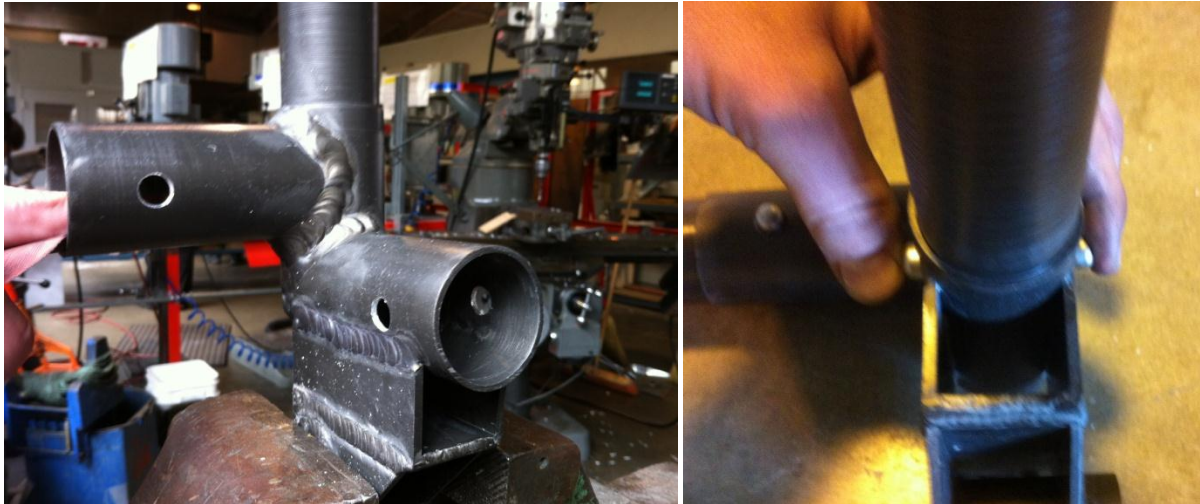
A) TRI-JOINT AFTER HOLES WERE DRILLED FOR THE QUICK RELEASE PINS. B) SHOWS HOW THE QUICK RELEASE PINS WORK. WHEN THE TWO PINS ARE EXTENDED, THE JOINT IS LOCKED IN PLACE. WHEN THEY ARE PRESSED IN, THE INSERT CAN SLIDE OUT OF THE TRI-JOINT.
